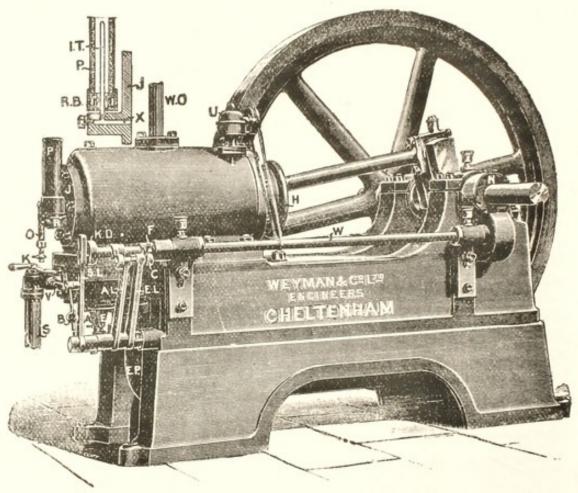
" TRUSTY" GAS ENGINE, VALVE GEAR SIDE.
